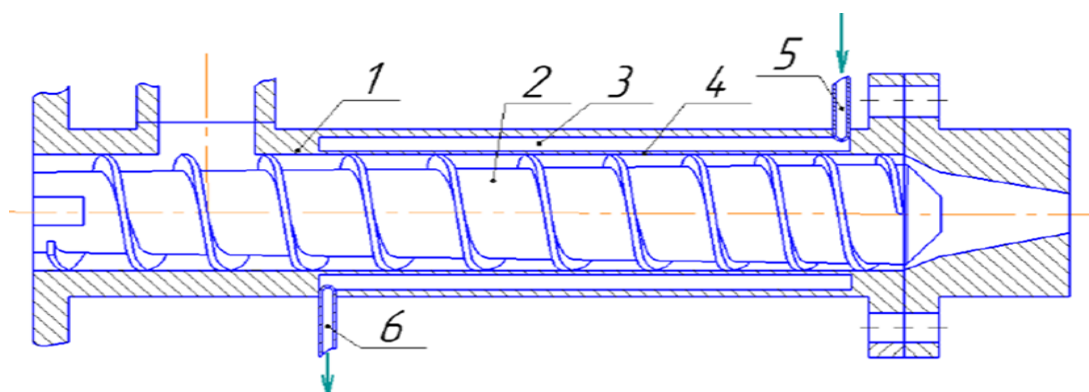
Melting unit of polyethylene and polypropylene processing unit (RF patent № 193148): 1–body of extruder; 2– screw; 3–hollow cylinder; 4– melting zone; 5 – steam inlet pipe; 6– steam outlet pipe
